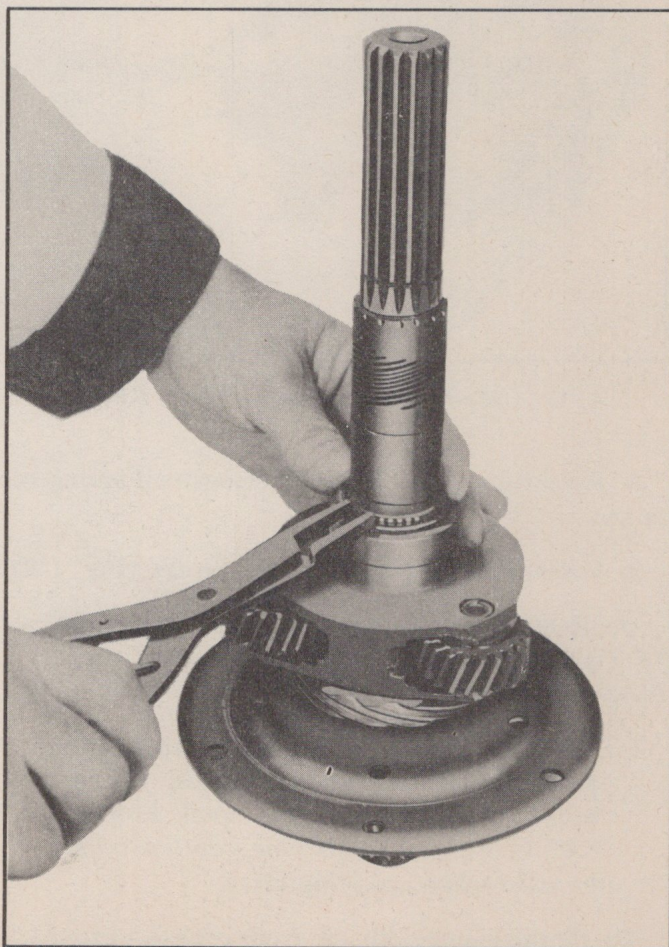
Removing Reverse Planet Carrier Snap Ring
